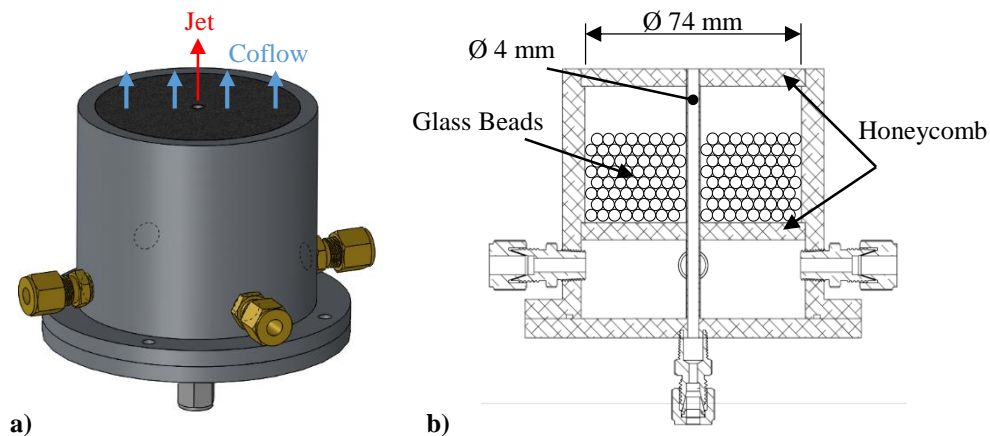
Yale coflow burner [209] a) solid model and b) cross-section drawing.
